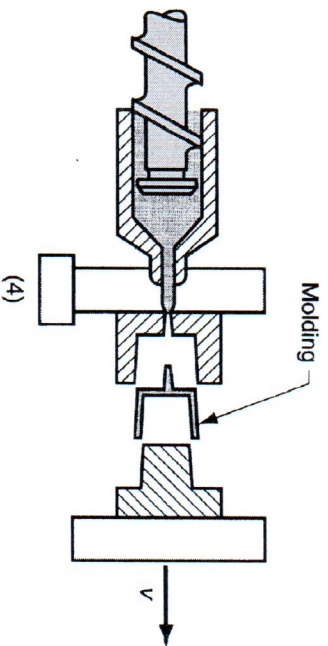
Typical molding cycle: (4) mold opens and part is ejected.
